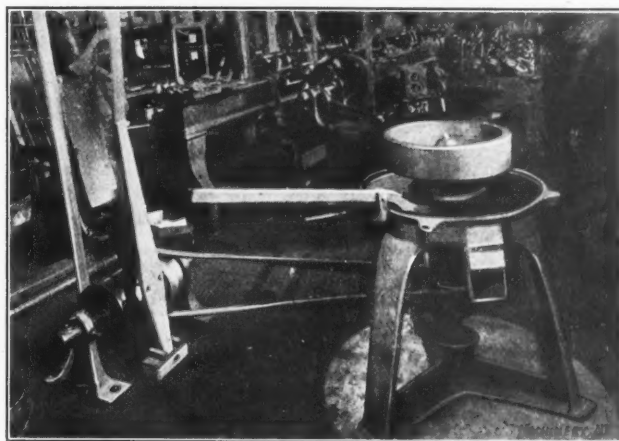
Fly-wheel Balancing Machine, with Wheel in Place
